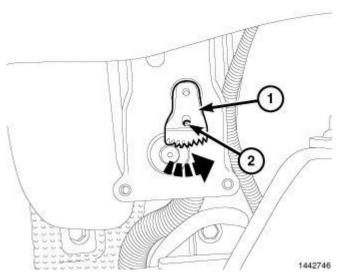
Selector Gear - Forward Position & Selector Gear Alignment Hole Courtesy of CHRYSLER GROUP, LLC
